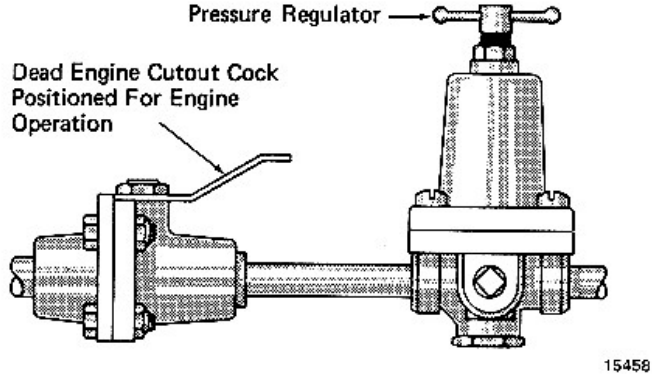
Dead Engine Cutout Cock And Pressure Regulator
